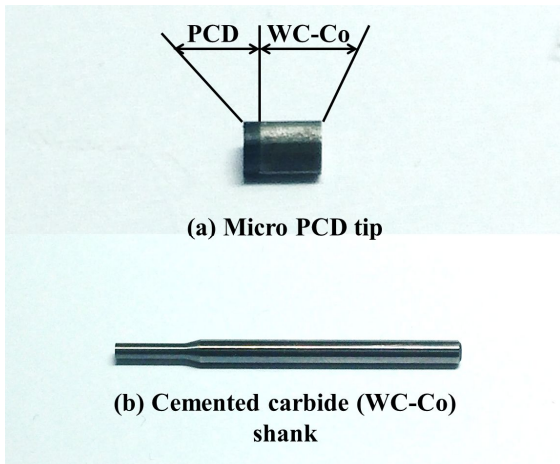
Workpieces used on diffusion bonding for micro PCD drill blank fabrication
